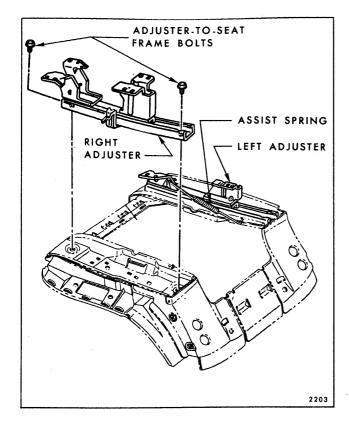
Manual Bucket Seat Adjuster Removal
